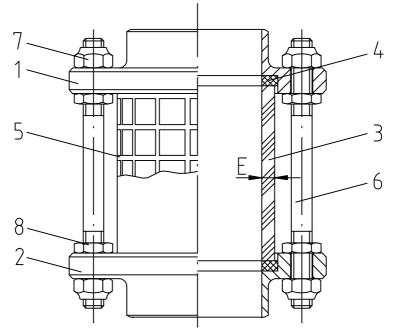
Sectional view of cylinder sight glass DIN SS (example)
